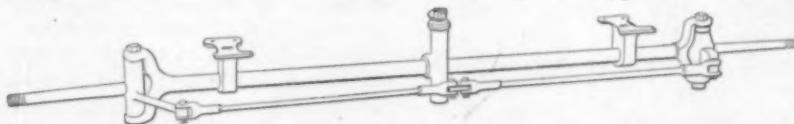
COMMON ARRANGEMENT OF AXLE, STEERING KNUCKLES AND RODS.
